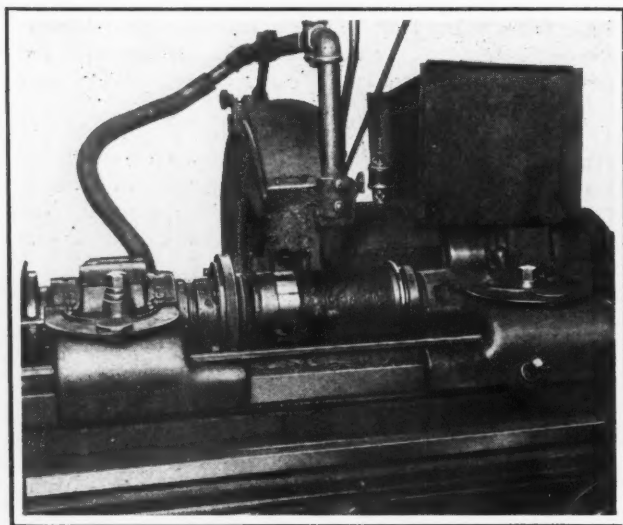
Grinding Two External Surfaces in a Standard Cylindrical Grinding Machine
